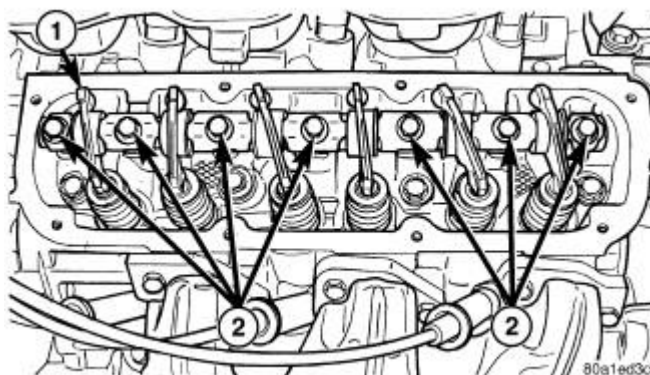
Rocker Arms, Shaft Assembly & Bolts
